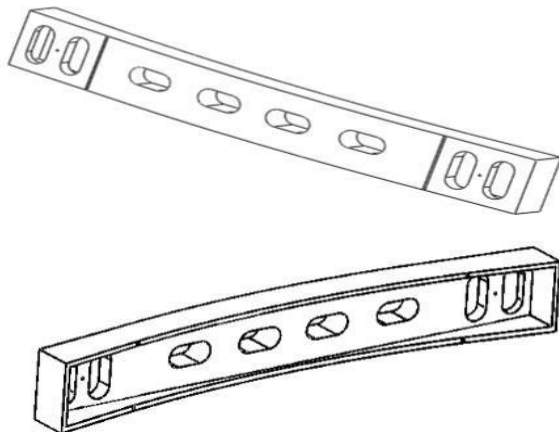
Existing Lifan 520 Model Steel Bumper Beam
